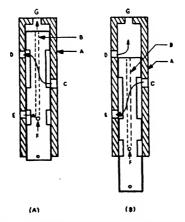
PISTON-TYPE SELECTOR VALVE.
